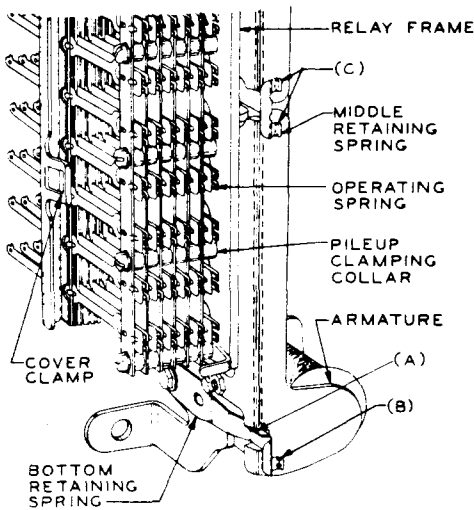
LUBRICATION POINTS BETWEEN ARMATURE AND RETAINING SPRINGS
